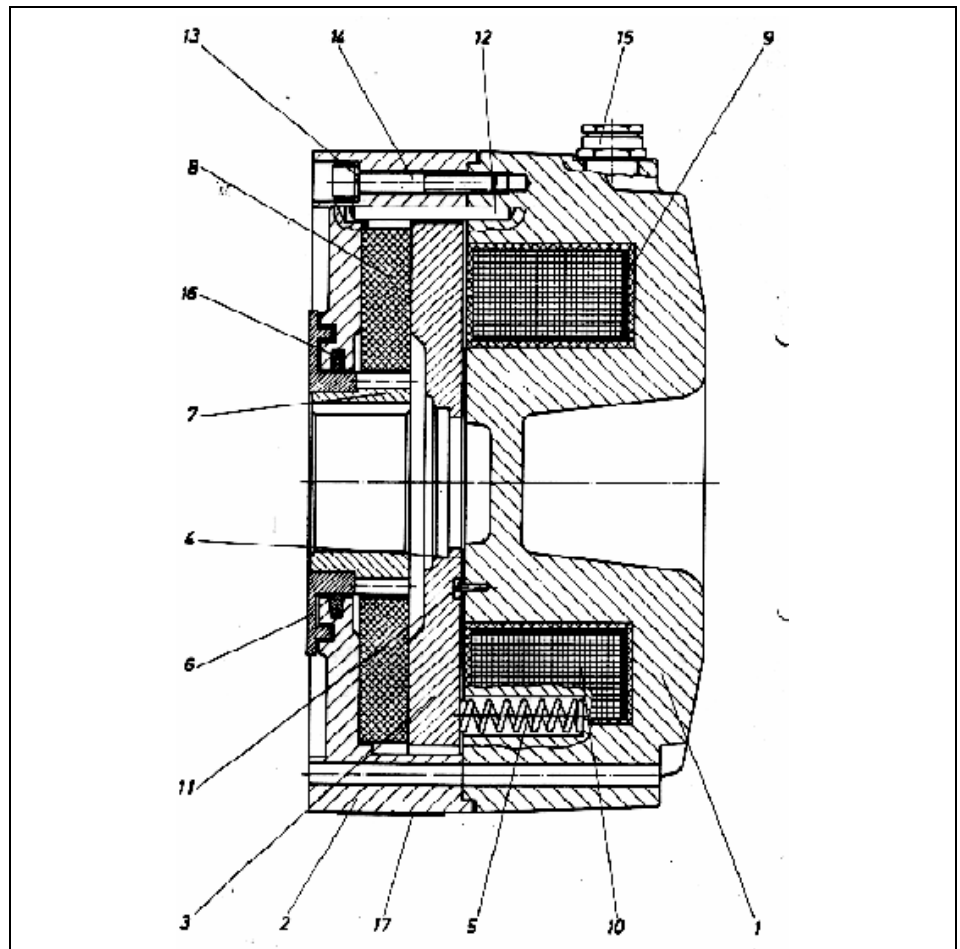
Single-disc spring-loaded brake with D.C. solenoid release
